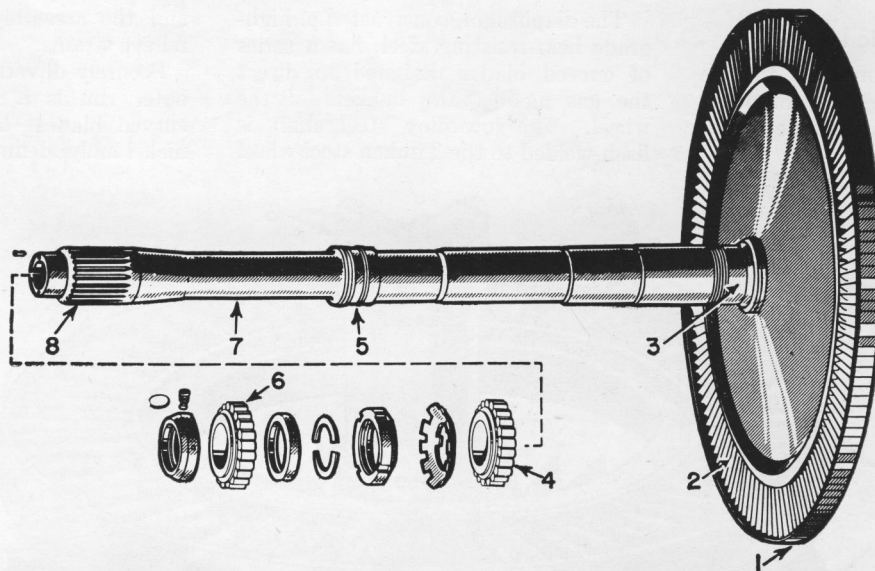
The turbine rotor assembly consists of (1) turbine wheel; (2) buckets; (3) No. 4 bearing journal; (4) No. 4 bearing; (5) No. 3 bearing journal; (6) No. 3 bearing; (7) turbine shaft; (8) main drive spline, fitting into the compressor rotor hub.
